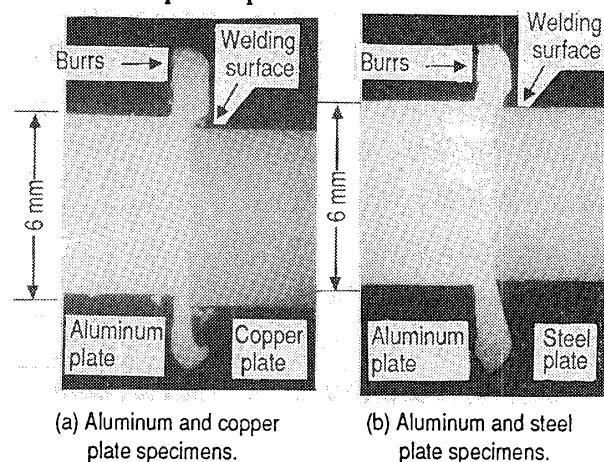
Weld condition of a 6 mm thick and 20, 30 mm width aluminum and copper, steel plate specimens.
